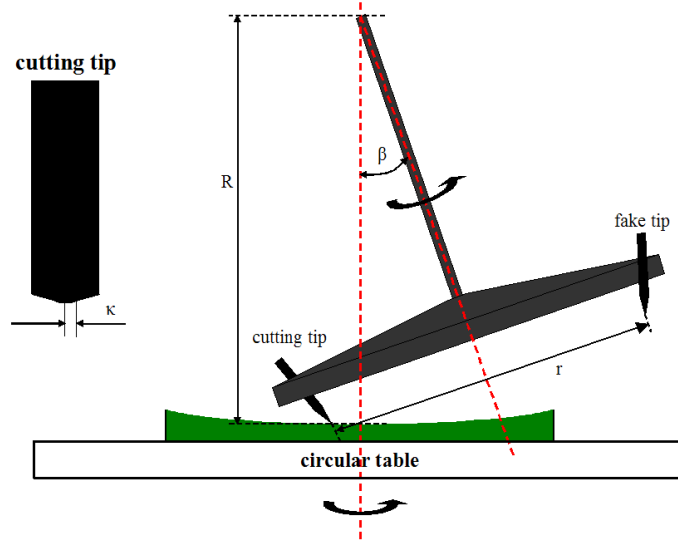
Schematic setup of the milling using a fly cutter: The diamond cutting tip is zoomed in.
